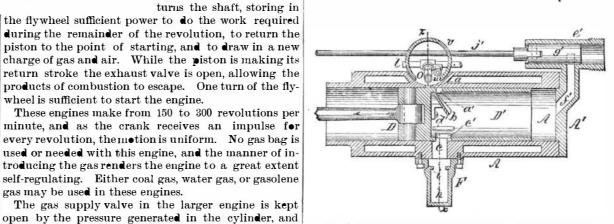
LONGITUDINAL SECTION OF GAS ENGINE CYLINDER.
